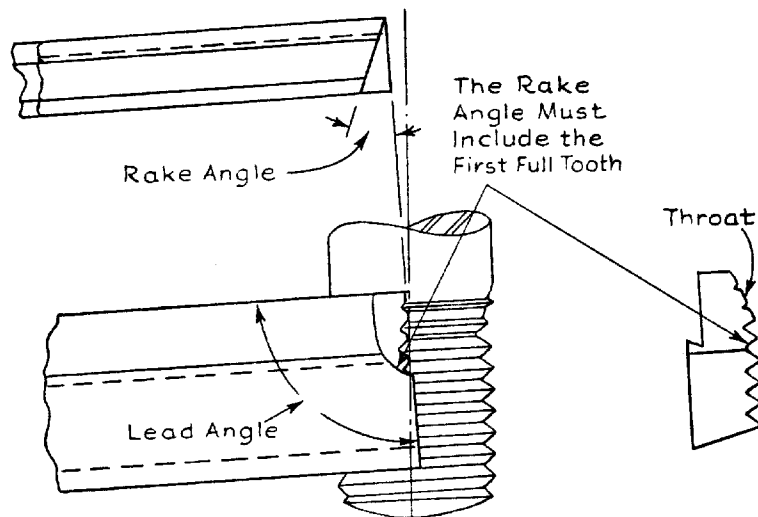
Chaser grind for cutting straight threads cut without lead screw feed
